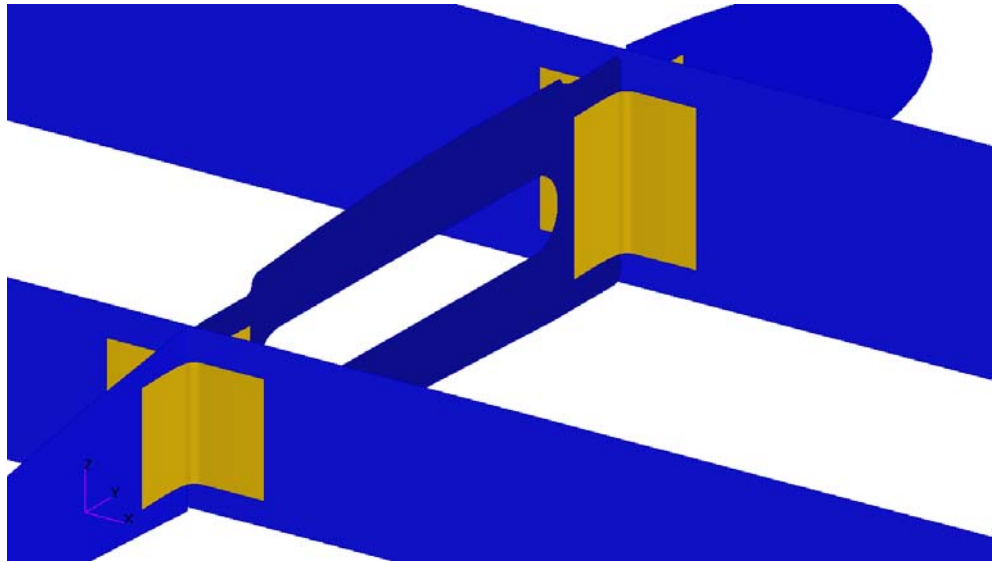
Zoomed Isometric View of Corner Connectors at a Unique Rib Segment of the Wing Torque Box
